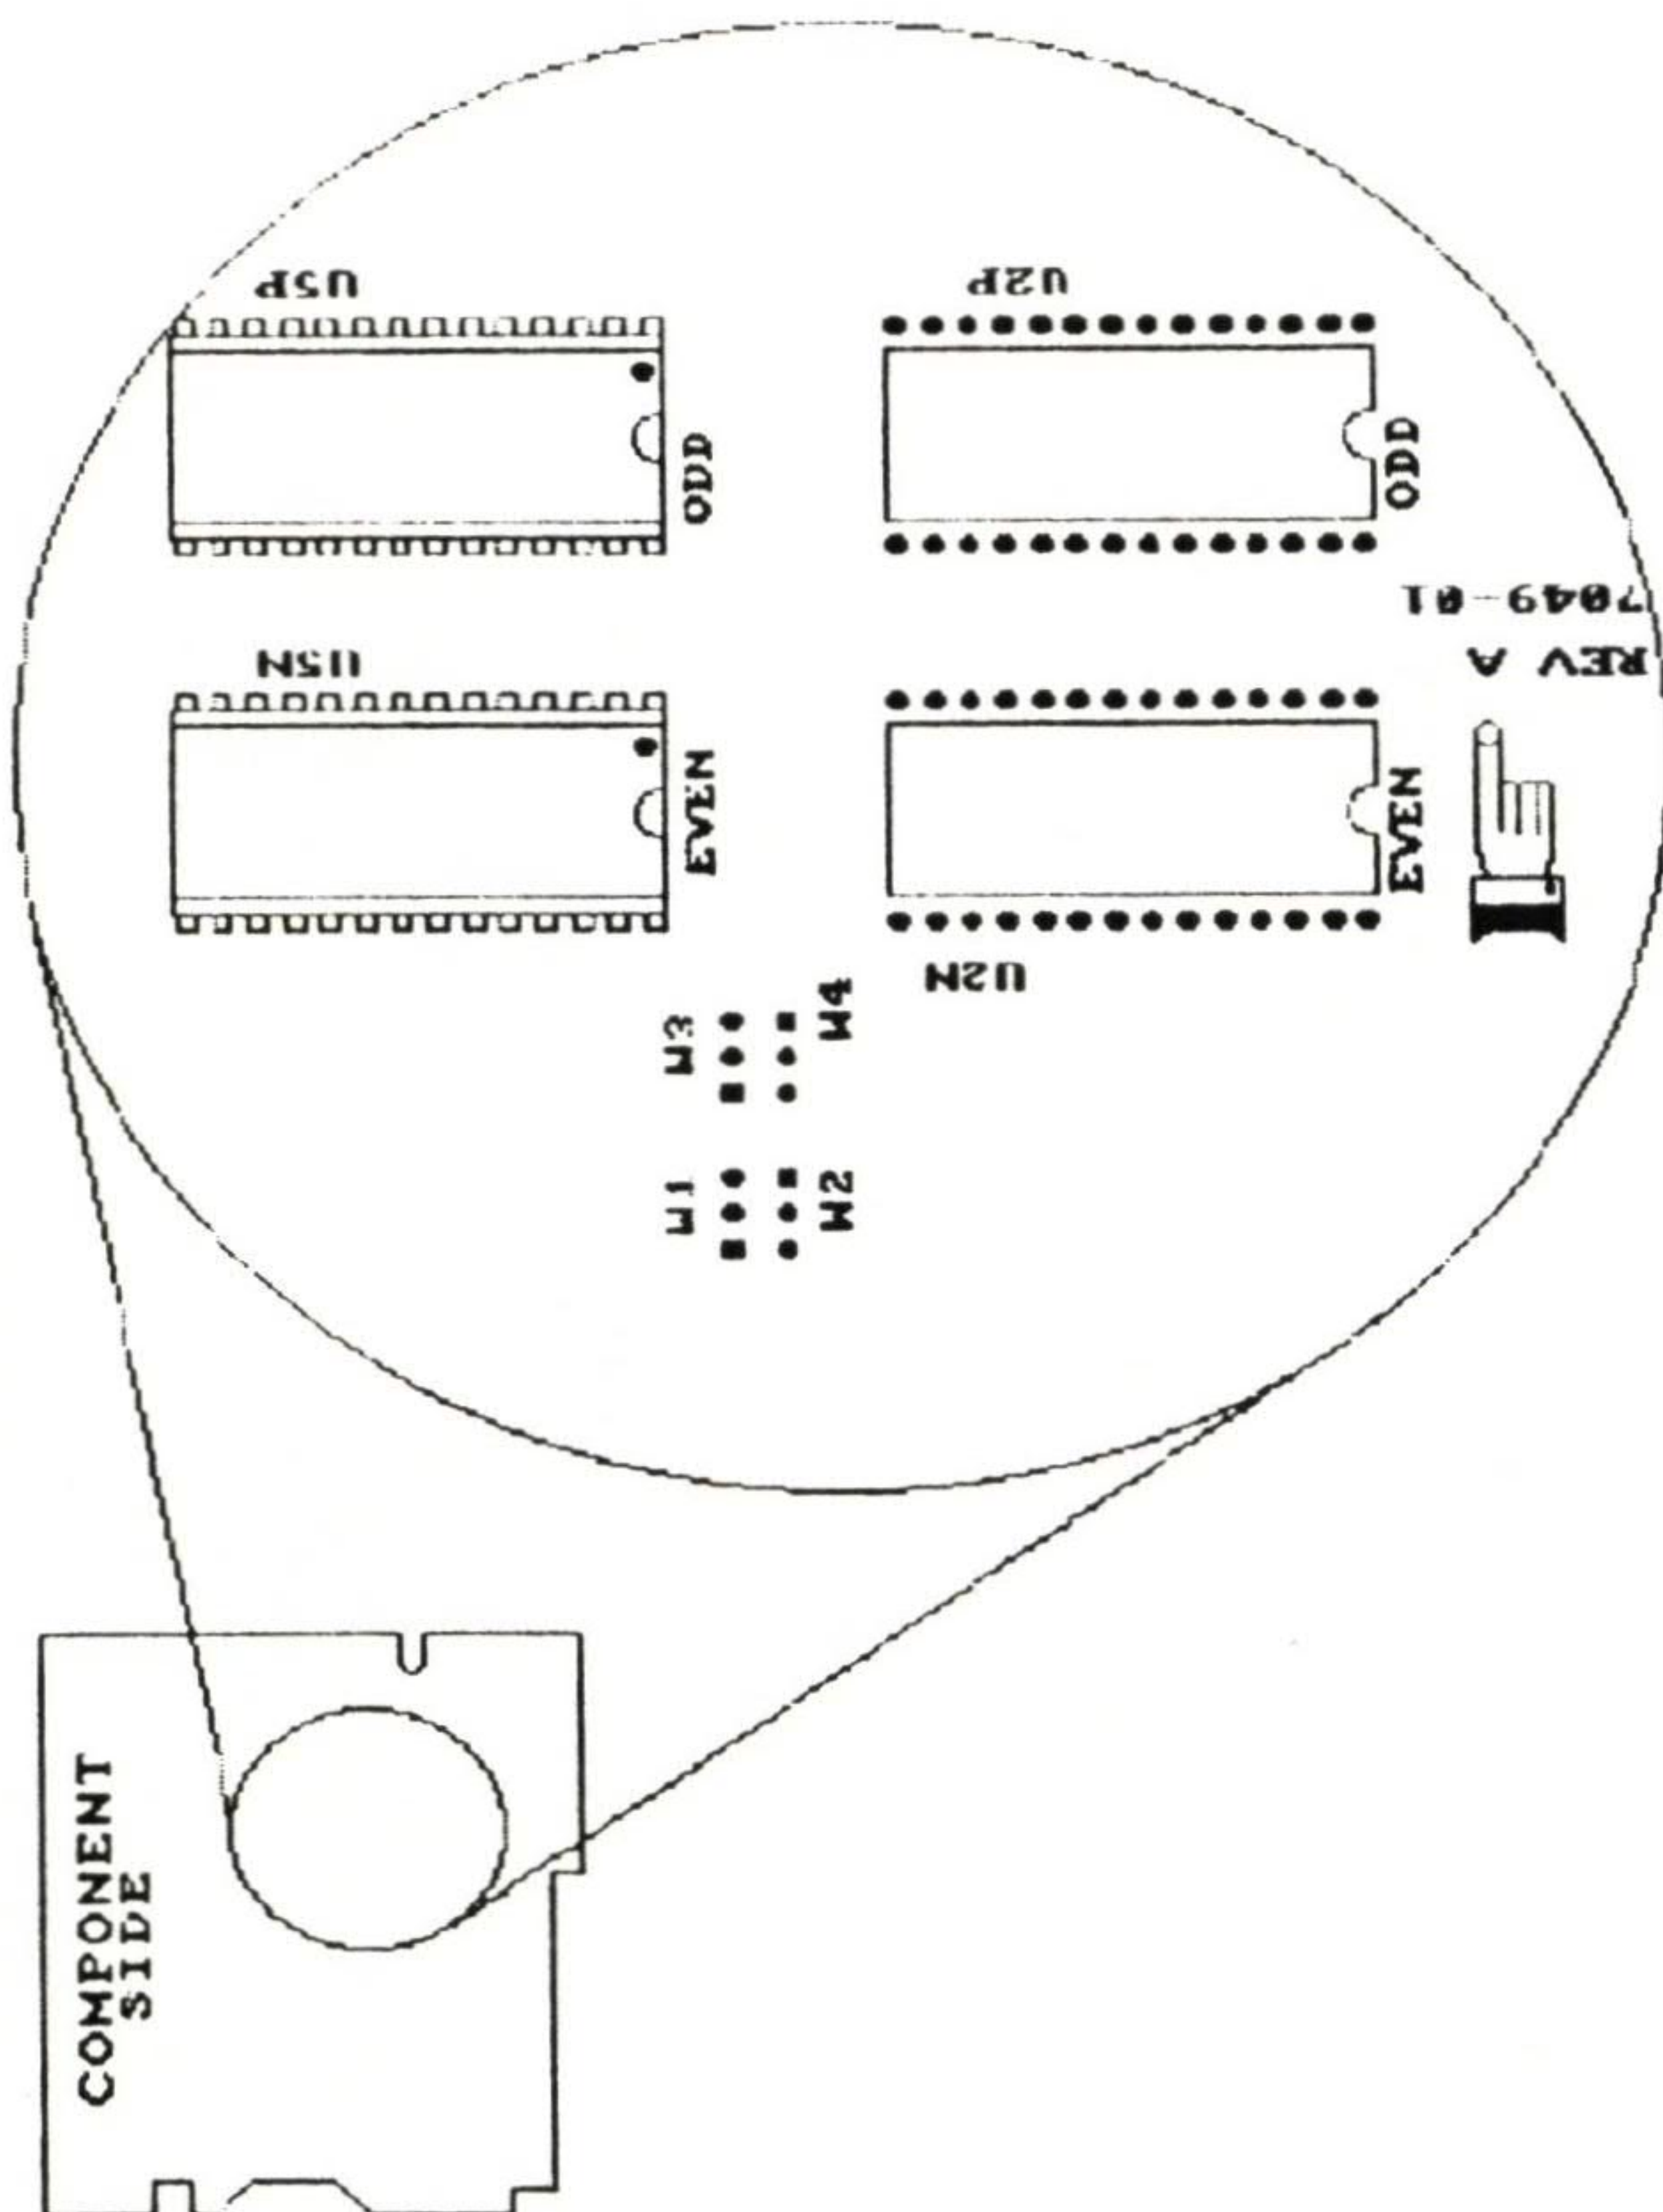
Details of the main circuit board, showing the location of the ROM chips and jumpers
